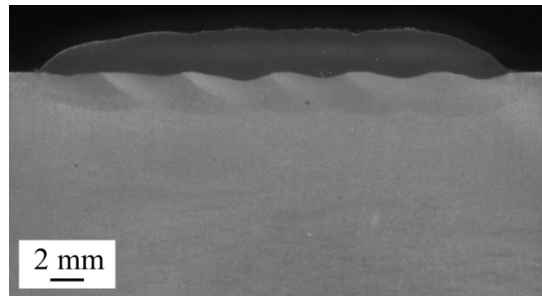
Cross-section of the deposit welded with welding parameters D
